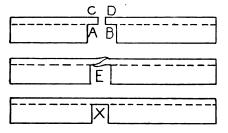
SHAPING AND WELDING ANGLE BARS.
